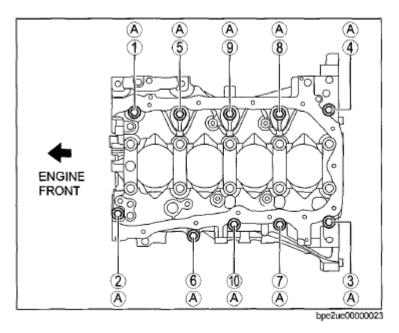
Identifying Lower Cylinder Block A Bolts Loosening Sequence
